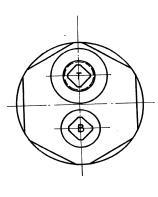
FLUID ADDING VALVE BOX — RECOIL BRAKE
